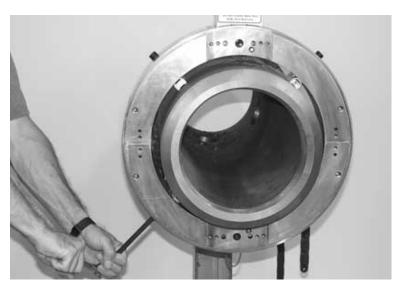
Tighten the clamping screw until the leg is just snug on the pipe.
